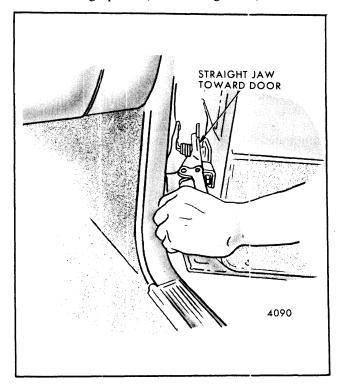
Front Door Hinge Hold-Open Spring Installation Using Tool J-23497, or Equivalent
